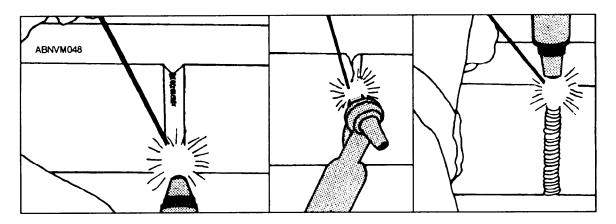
Techniques of torch and filler rod handling for tubular sections.
